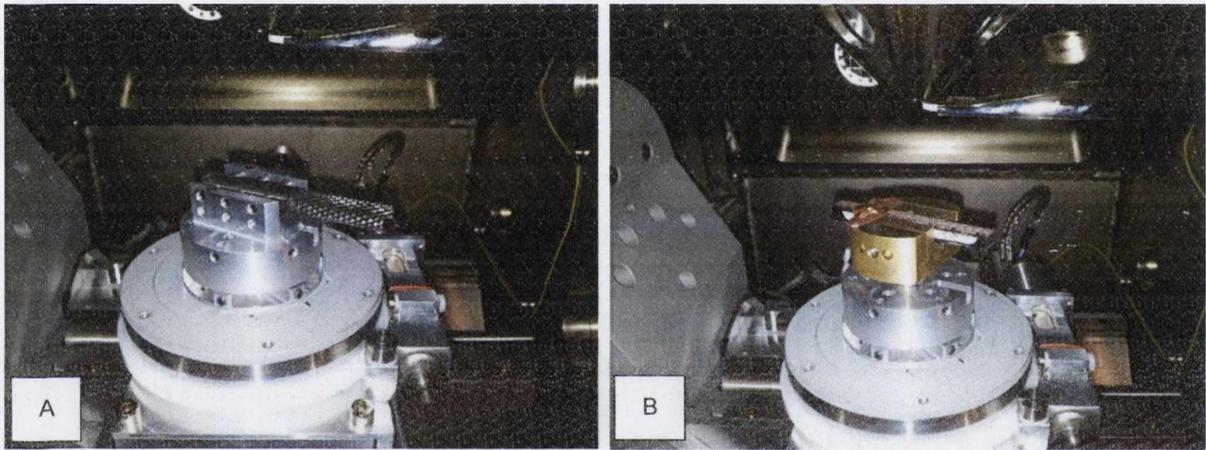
SEM setup for (A) cutting tool and (B) CFRP machined workpiece.
